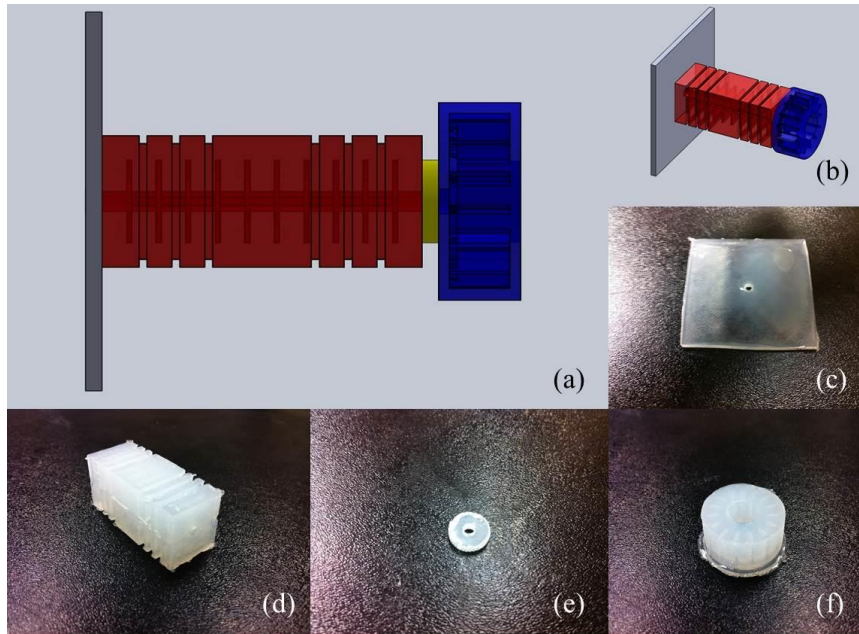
A Whole Soft Mechanism, (a) Front View of 3D Soft Interconnection Mechanism Model; (b) Trimetric View of 3D Soft Interconnection Mechanism Model; (c) Flat Sheet; (d) Extension Mechanism; (e) Connection Ring; (f) Capture Mechanism
